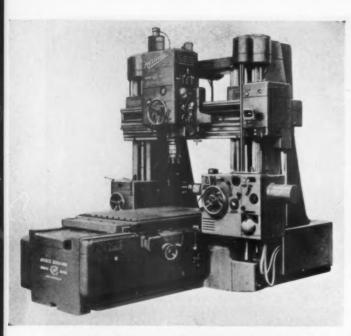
Modern three co-ordinate combined jig boring and milling machine weighing approximately 14 tons.
